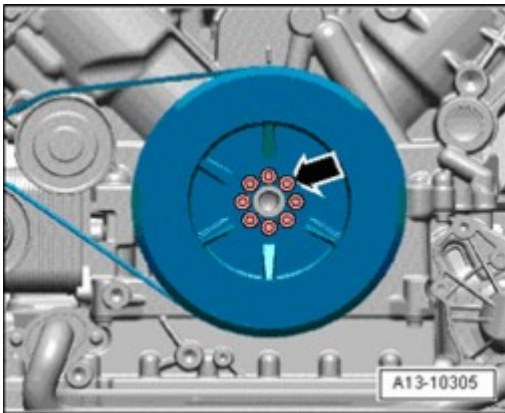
Loosening Mounting Bolts On Vibration Damper
